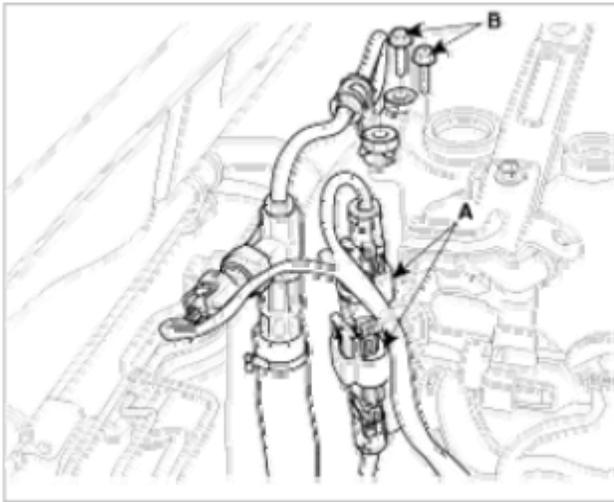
Locating RH Oxygen Sensor Connector And Power Steering Hose Mounting Bolts
